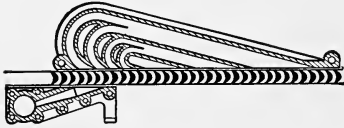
Developed Section through Nozzle Blades and Reversing Chamber, Westinghouse Impulse Turbine.
